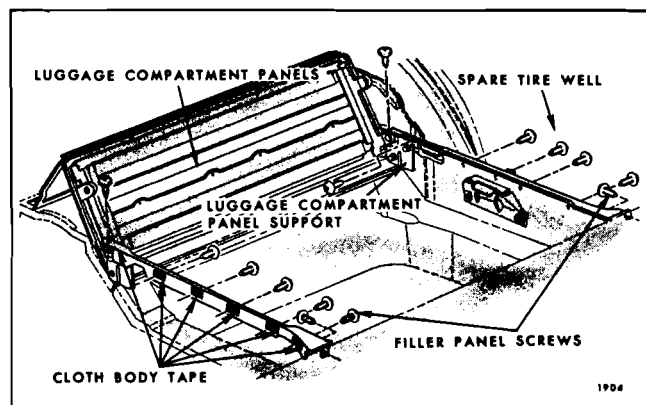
Rear Compartment Pan Side Filler Panels
